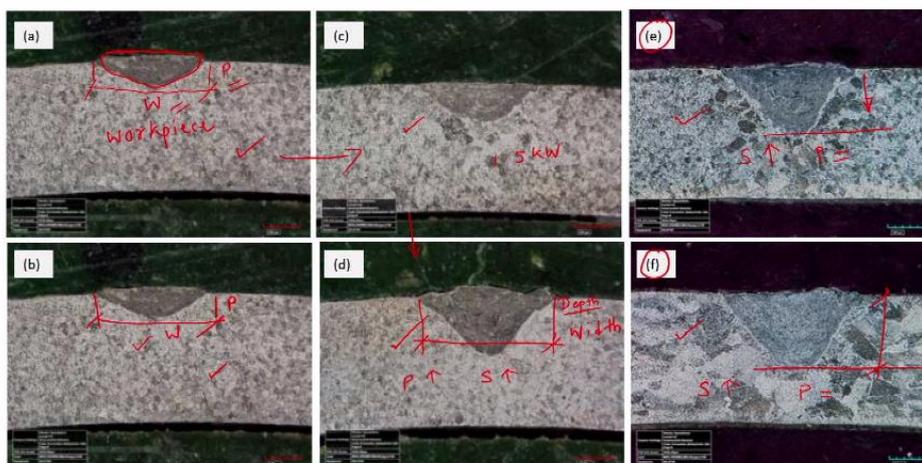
Microstructure of welded joints; (a) Welding speed 1 m/min, laser power 1 kW; (b) Welding speed 1 m/min, laser power 1.2 kW; (c) Welding speed 1 m/min, laser power 1.5 kW; (d) Welding Speed 2 m/min, laser power 2 kW; (e) Welding speed 3 m/min, laser power 2 kW; (f) Welding speed 4 m/min, laser power 2 kW
